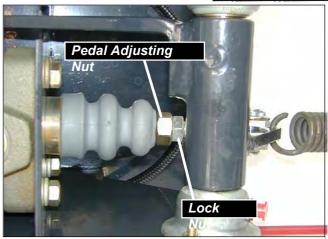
The hydraulically powered booster in conjuction with the master cylinder, provides a power assist for applying hydraulic brakes. The brake system is composed of the following:
